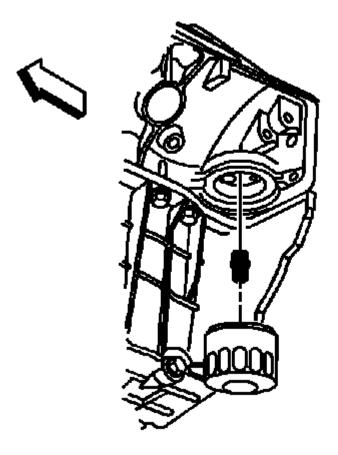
View Of Oil Filter & Adapter Courtesy of GENERAL MOTORS CORP.
